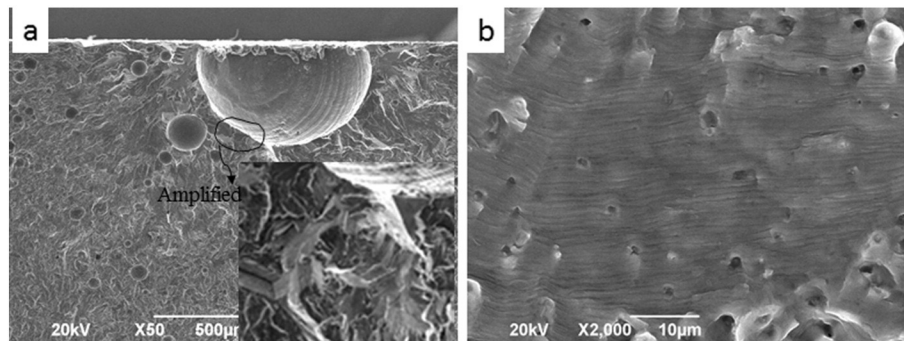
Fracture morphologies of welded joints under 70% humidity. (a) Crack source zone; (b) crack propagation zone.
